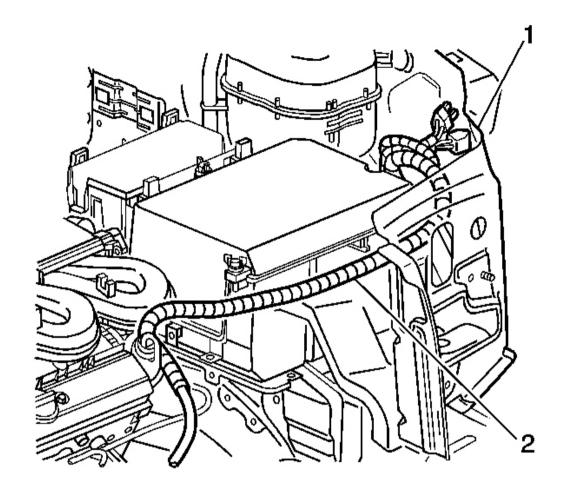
View Of Coolant Heater Cord From The Washer Bottle & The Coolant Reservoir Courtesy of GENERAL MOTORS CORP.
